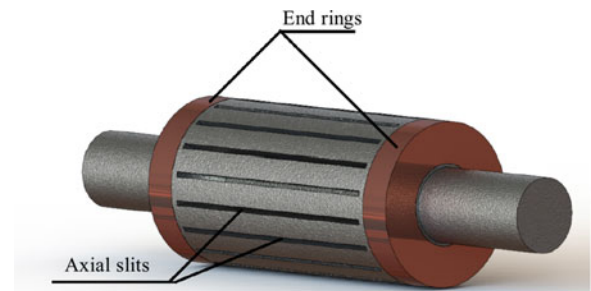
3-D model of the solid rotor with axial slits and conducting end rings.
